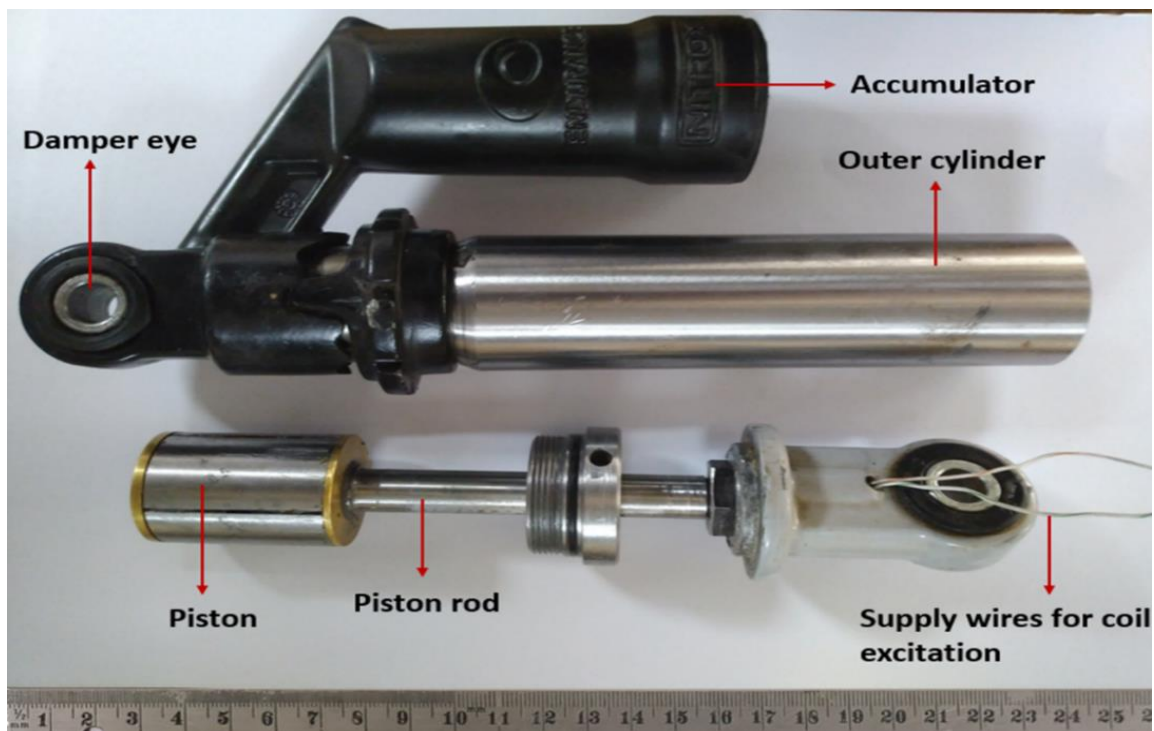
Fabricated radial flux two-wheeler MR damper disassembled view
